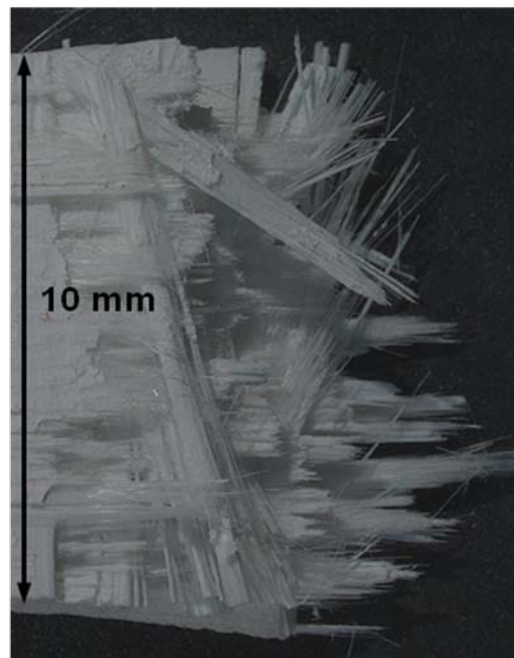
Fracture surface of the N720/AM specimen tested in tension to failure with constant loading rate of 25MPa at 1100°C in steam.
